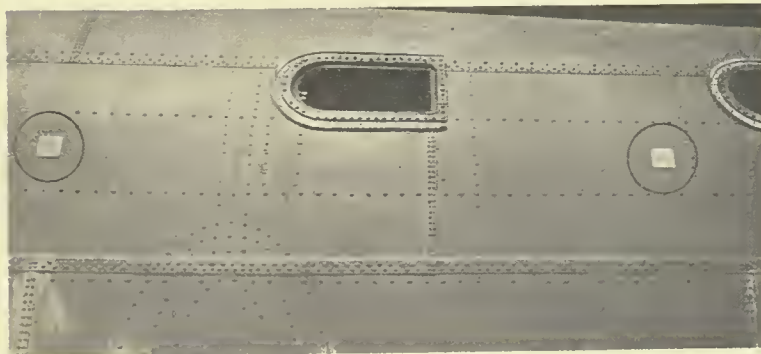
DATUM-MARK PLATES ON OUTSIDE OF HULL
